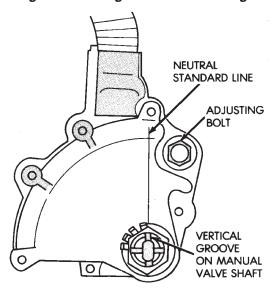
Park/Neutral Position Switch Installation/ Adjustment
